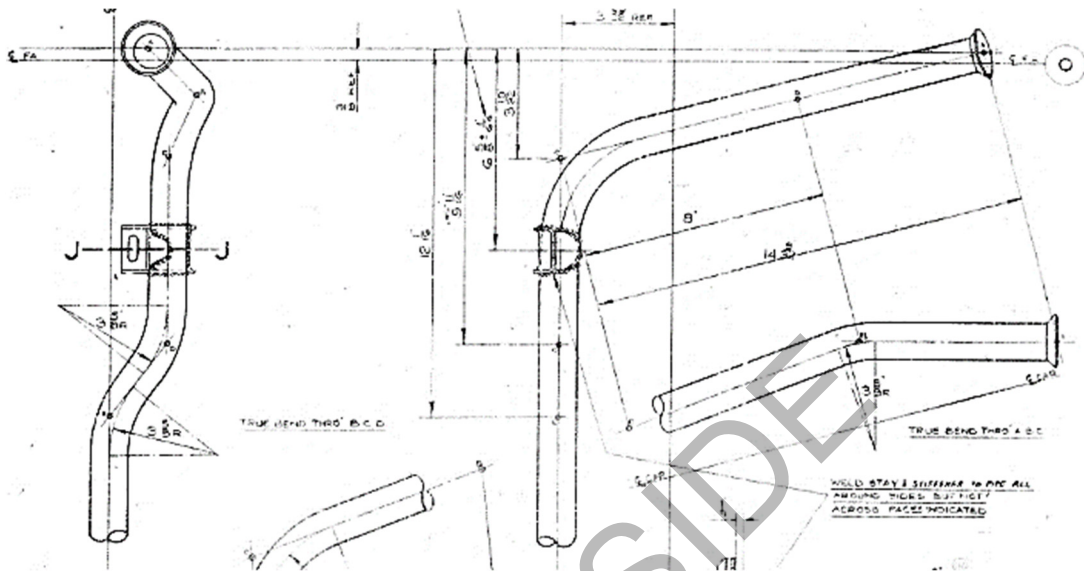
Exhaust pipe detail near engine AYA2021.
